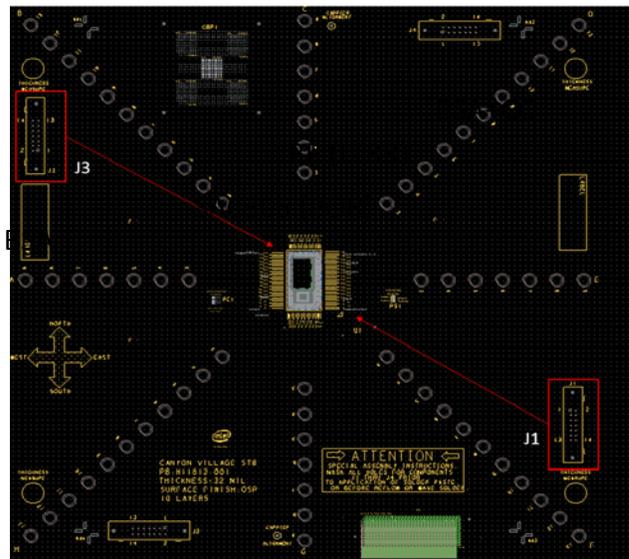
Top views of the printed circuit board used for the Mechanical Shock tests.
